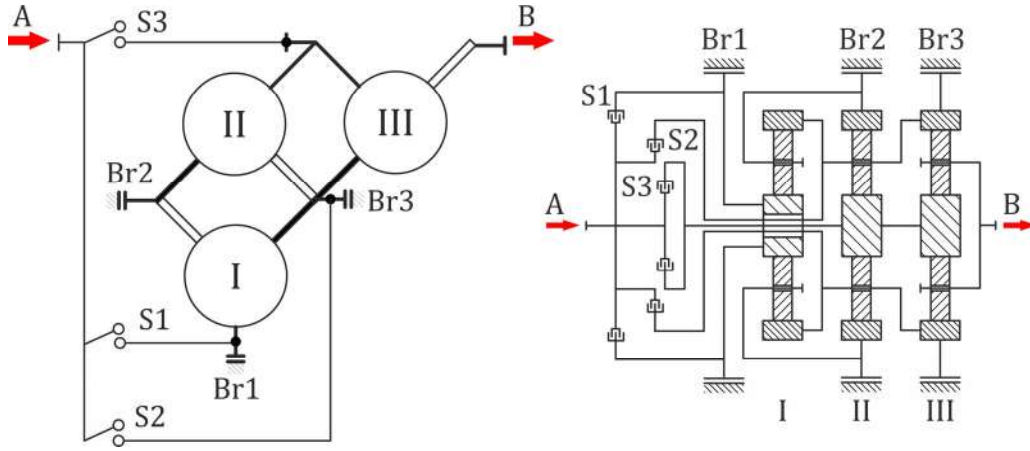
Structural (left) and kinematic scheme (right) of the three-carrier, six-speed ZF 6HP500 gearbox
